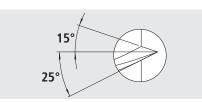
The asymmetric thread guarantees better pull-out and stripping resistance.
